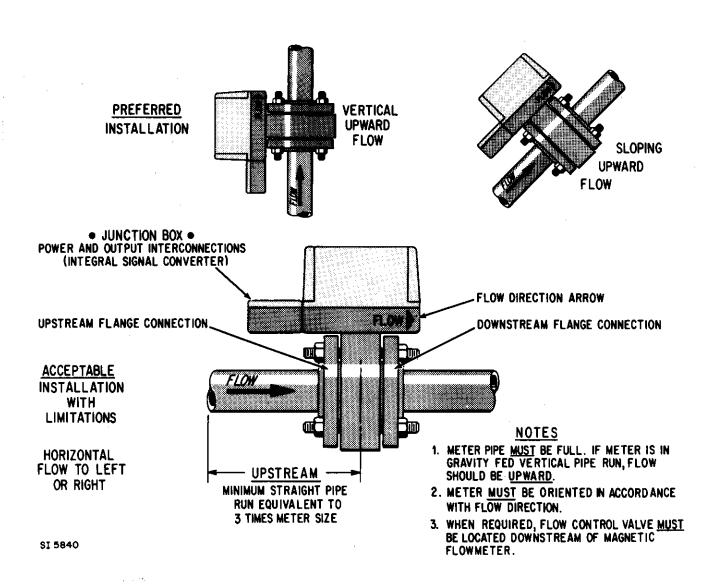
RECOMMENDED PIPING ARRANGEMENT
